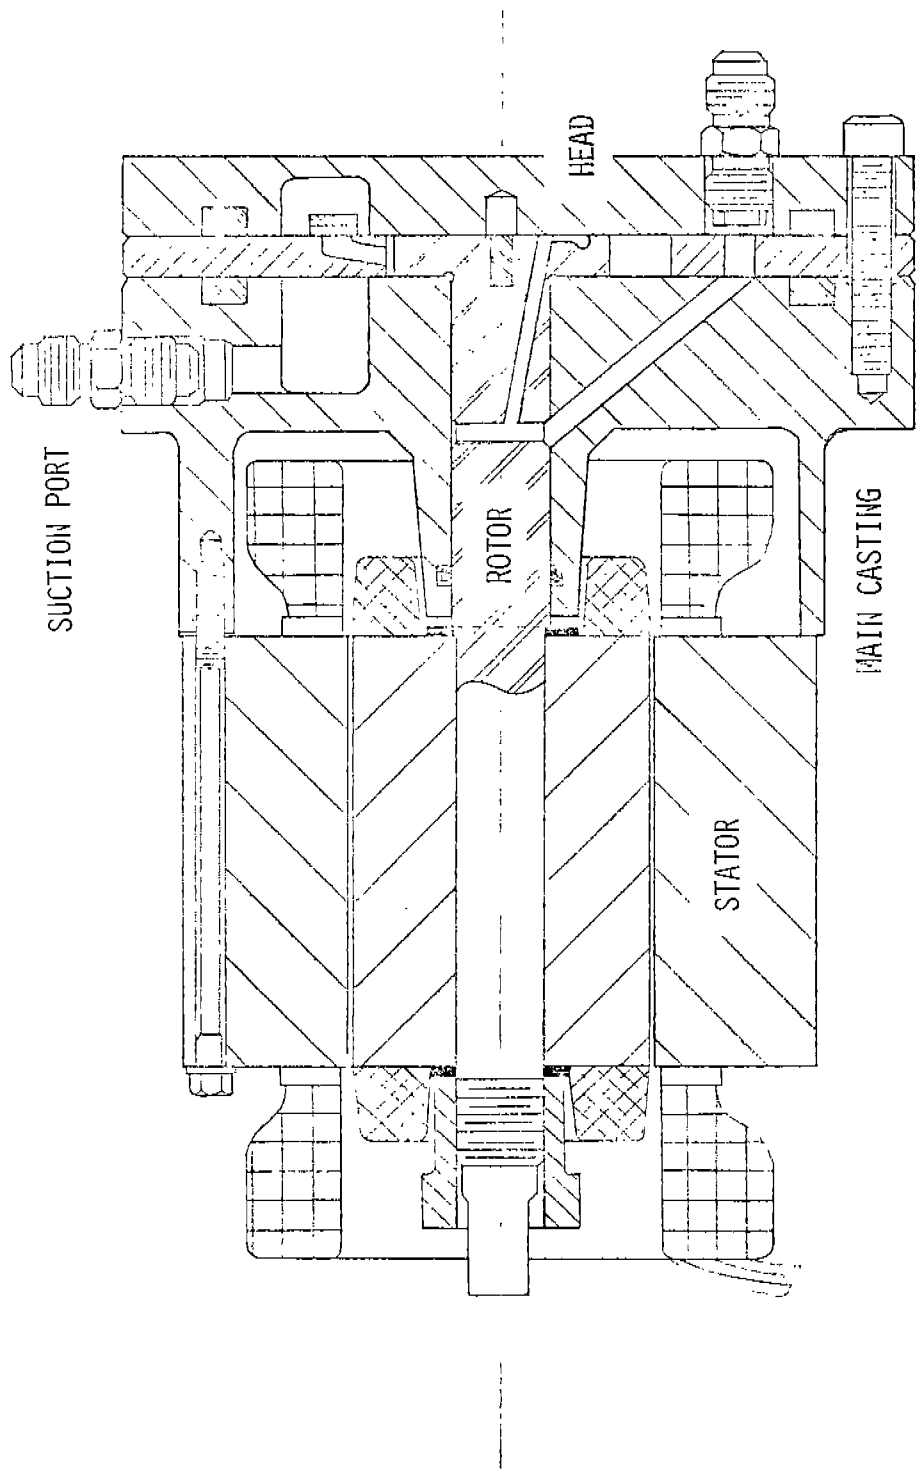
CUTAWAY DRAWING OF OPEN CASE COMPRESSOR.
